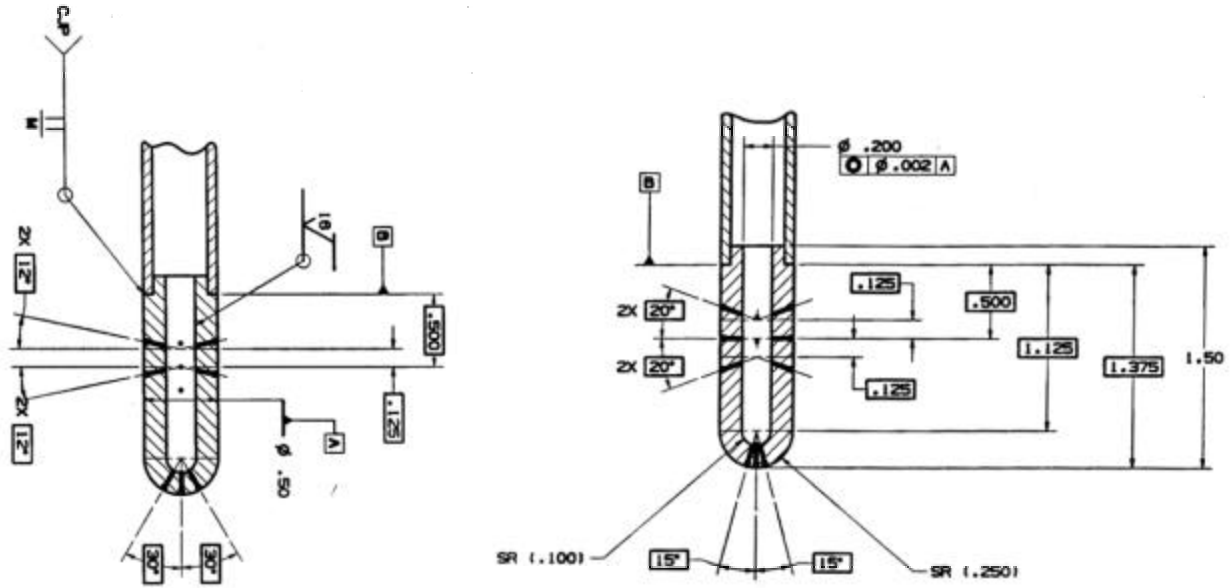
Cross sections of HPR nozzle. Right drawing is 90° rotated compared to the left drawing.
